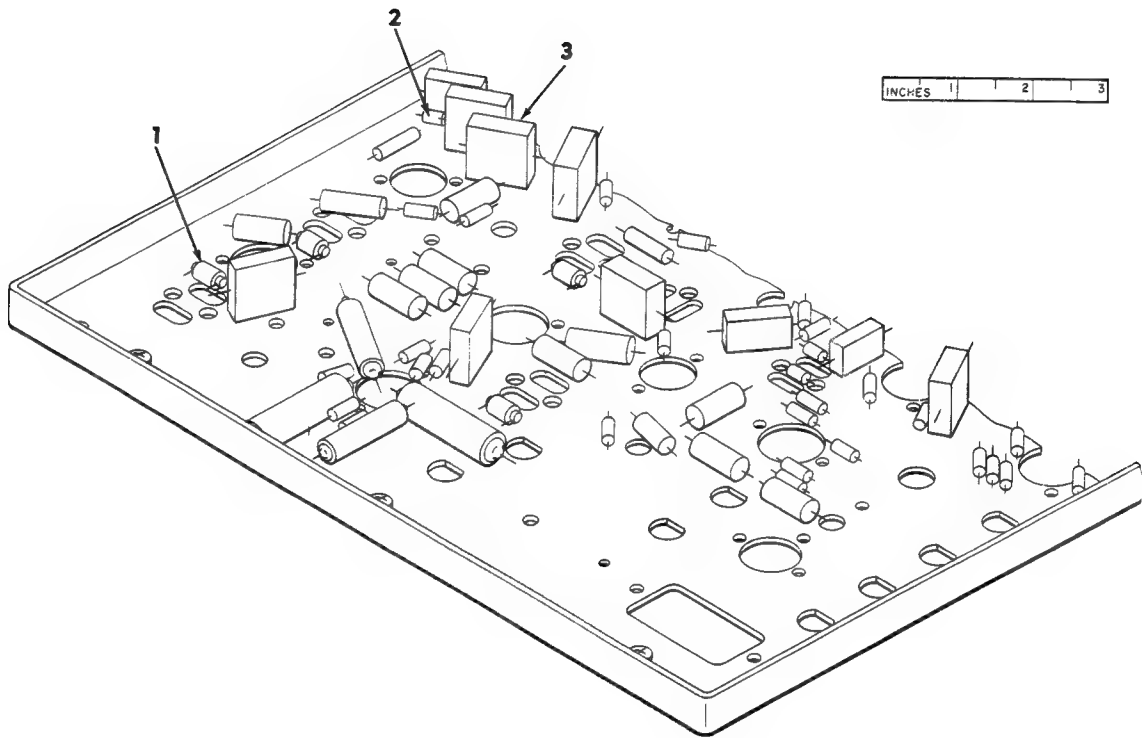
Generator assembly, pulse '9143996)—partial exploded view
